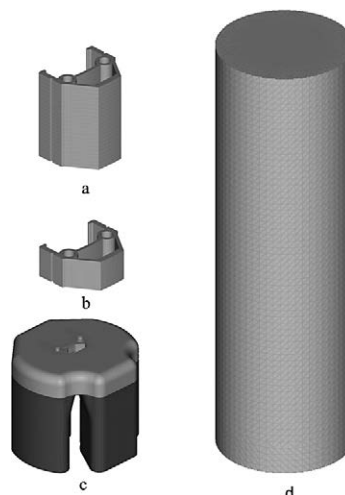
3D meshing: (a) Profile; (b) Work belt; (c) Welding Chamber and Shunt Holes; (d) Bar stock
